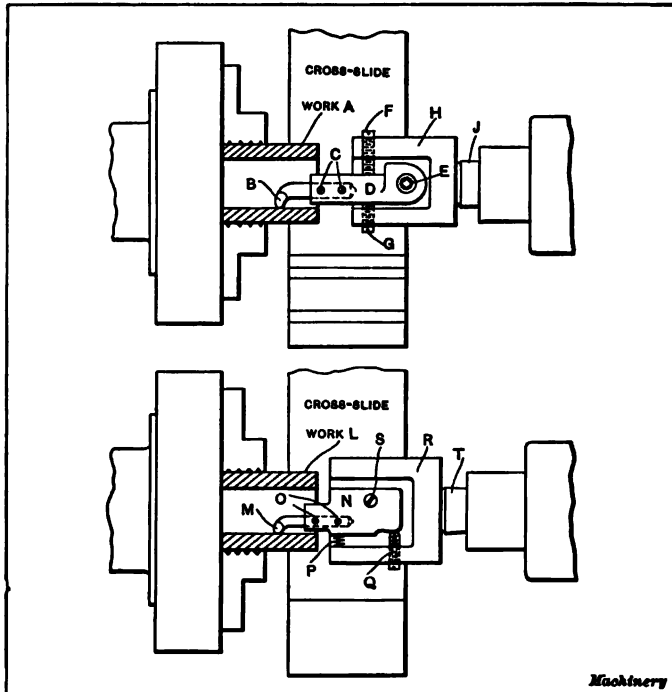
Two Types of Adjustable Boring Tools for Tool-room Work
